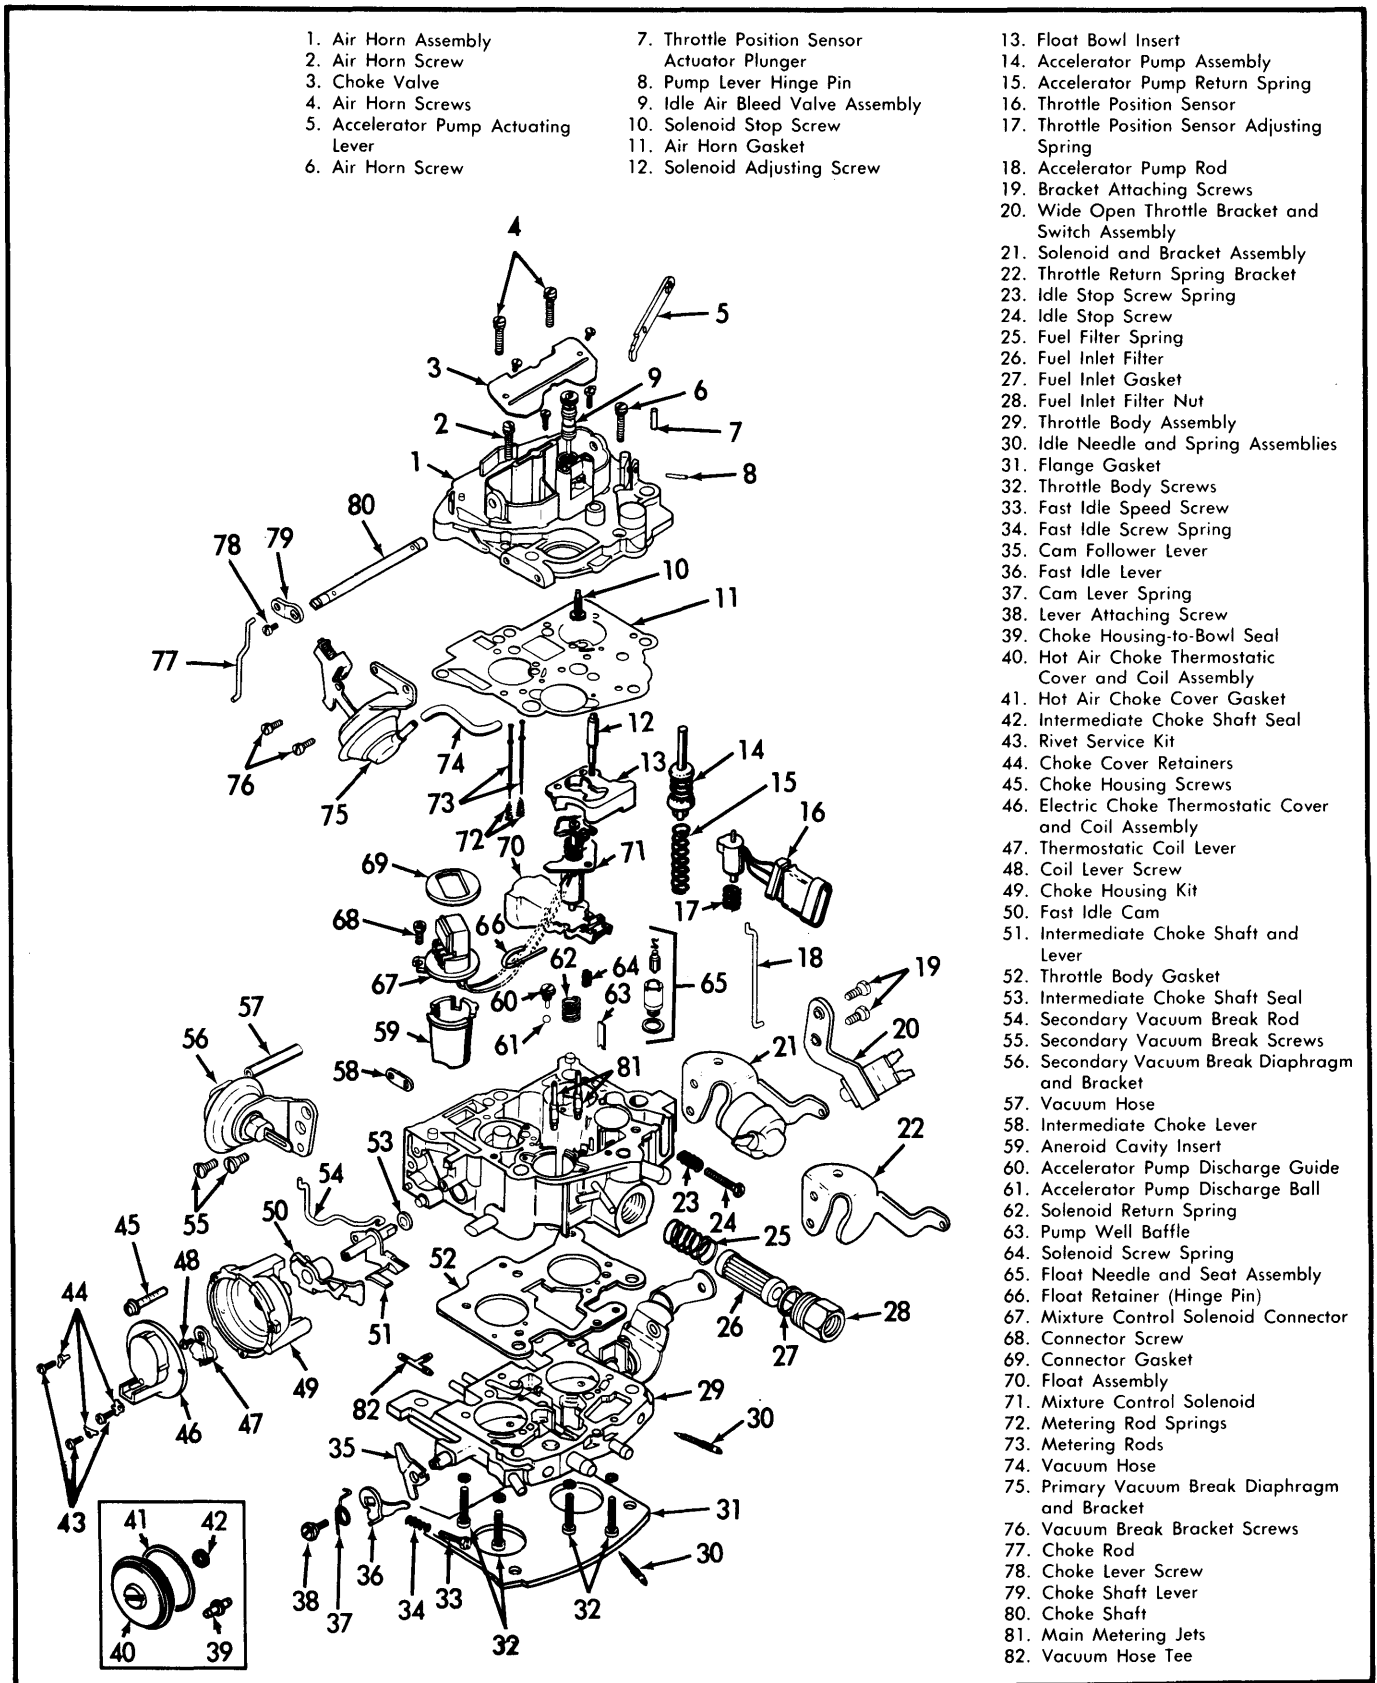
Exploded View of Rochester E2MC and E2ME 2-Barrel Carburetor
